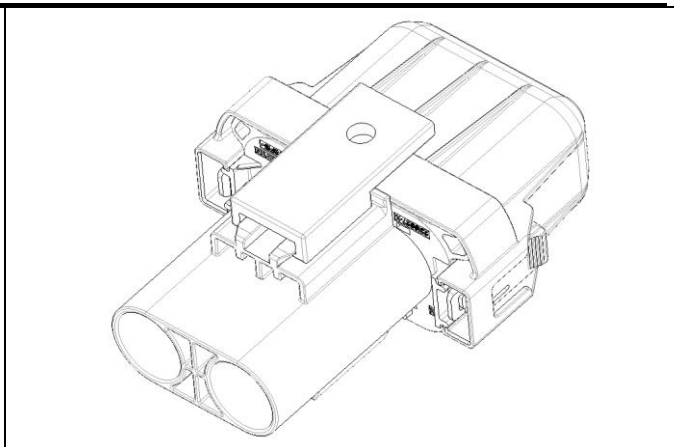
shows the engaged position of mounting clip to the raised bump in the housing.
